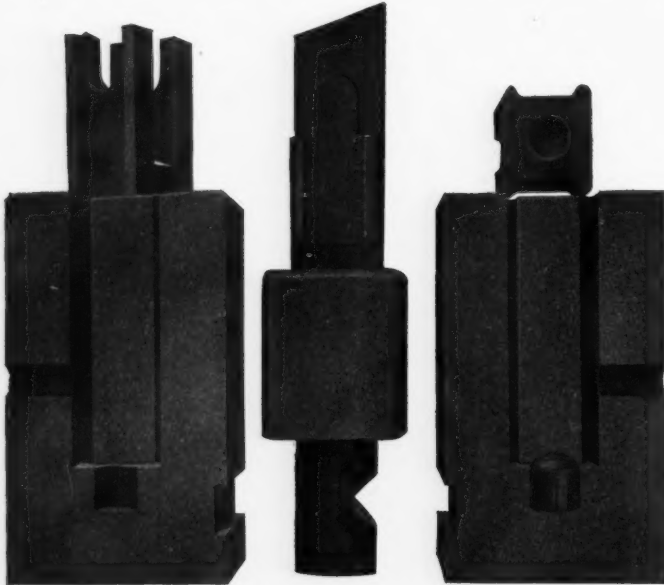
Dies and Former for Slack Adjusting Rod Blocks.
